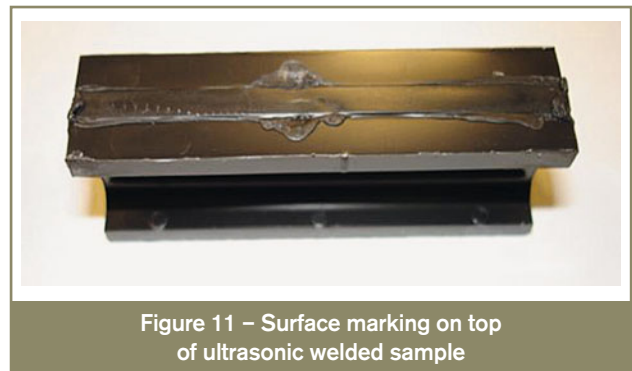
Surface marking on top of ultrasonic welded sample
